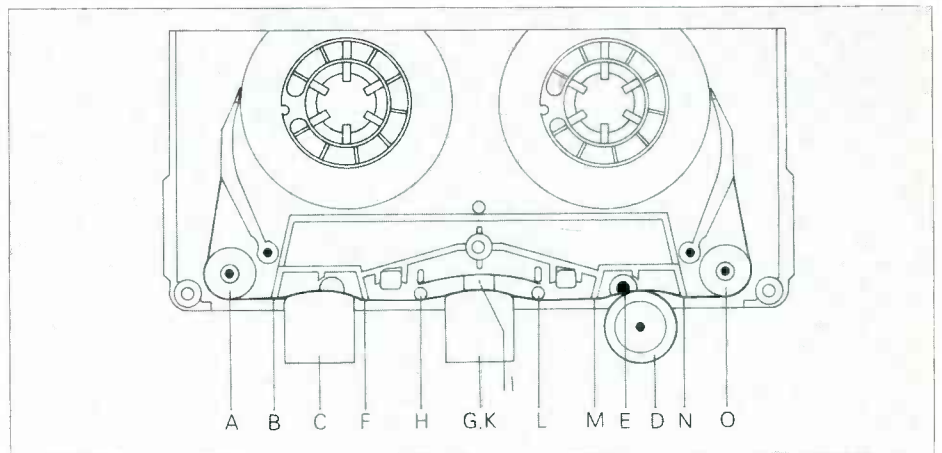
Tape path and C-0 components. A = left roller and axle; B/F = left stay guides; C = erase head; D = pinch wheel; E = capstan; G/K = record/play head(s); H/L = pin guides; I = pressure pad and spring; M/N = right stay guides; O = right roller and axle.
